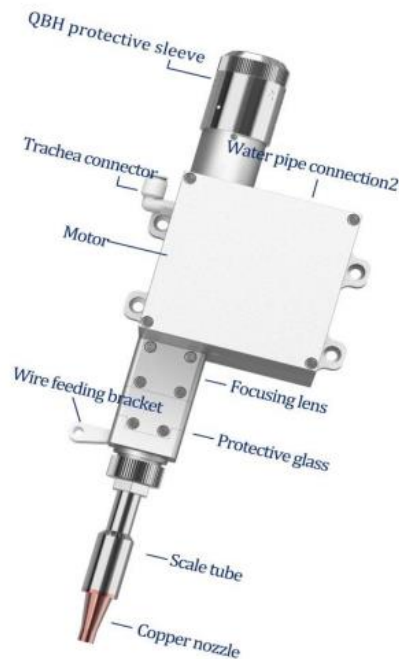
Schematic diagram of double pendulum welding head
